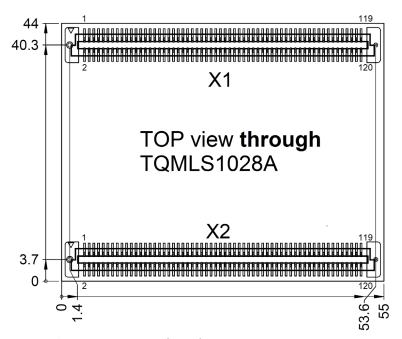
TQMLS1028A dimensions, top view through TQMLS1028A
